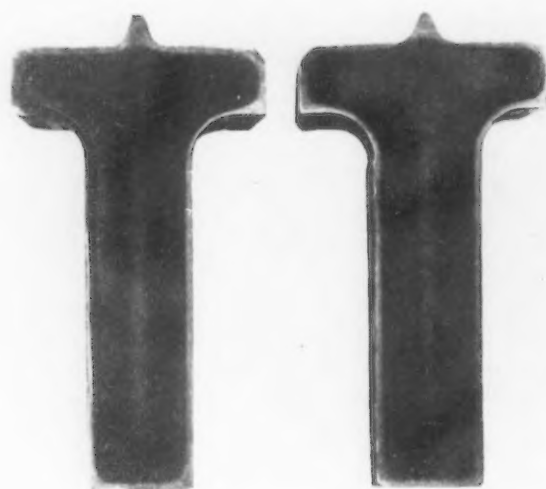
Two parts made from same bar of steel. Part 1 (left) quenched from 1440 deg. F. in brine using flush fixture. Part 2 (right) quenched from 1440 deg. F. in brine using conforming fixture.
